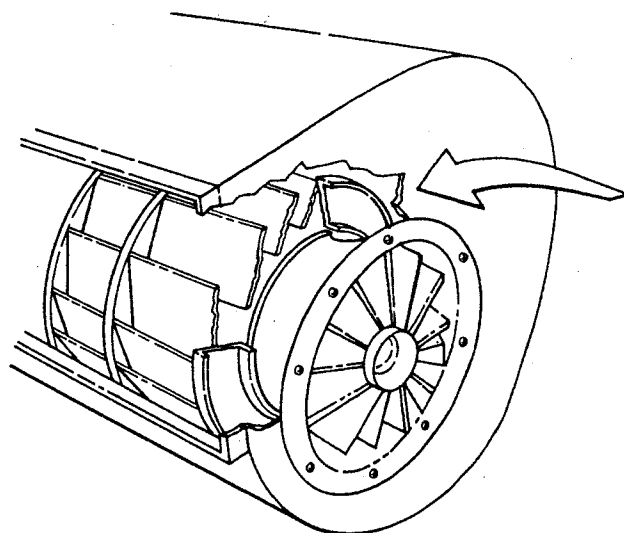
AIRFOIL INLET VANE AND CONE ASSEMBLY
